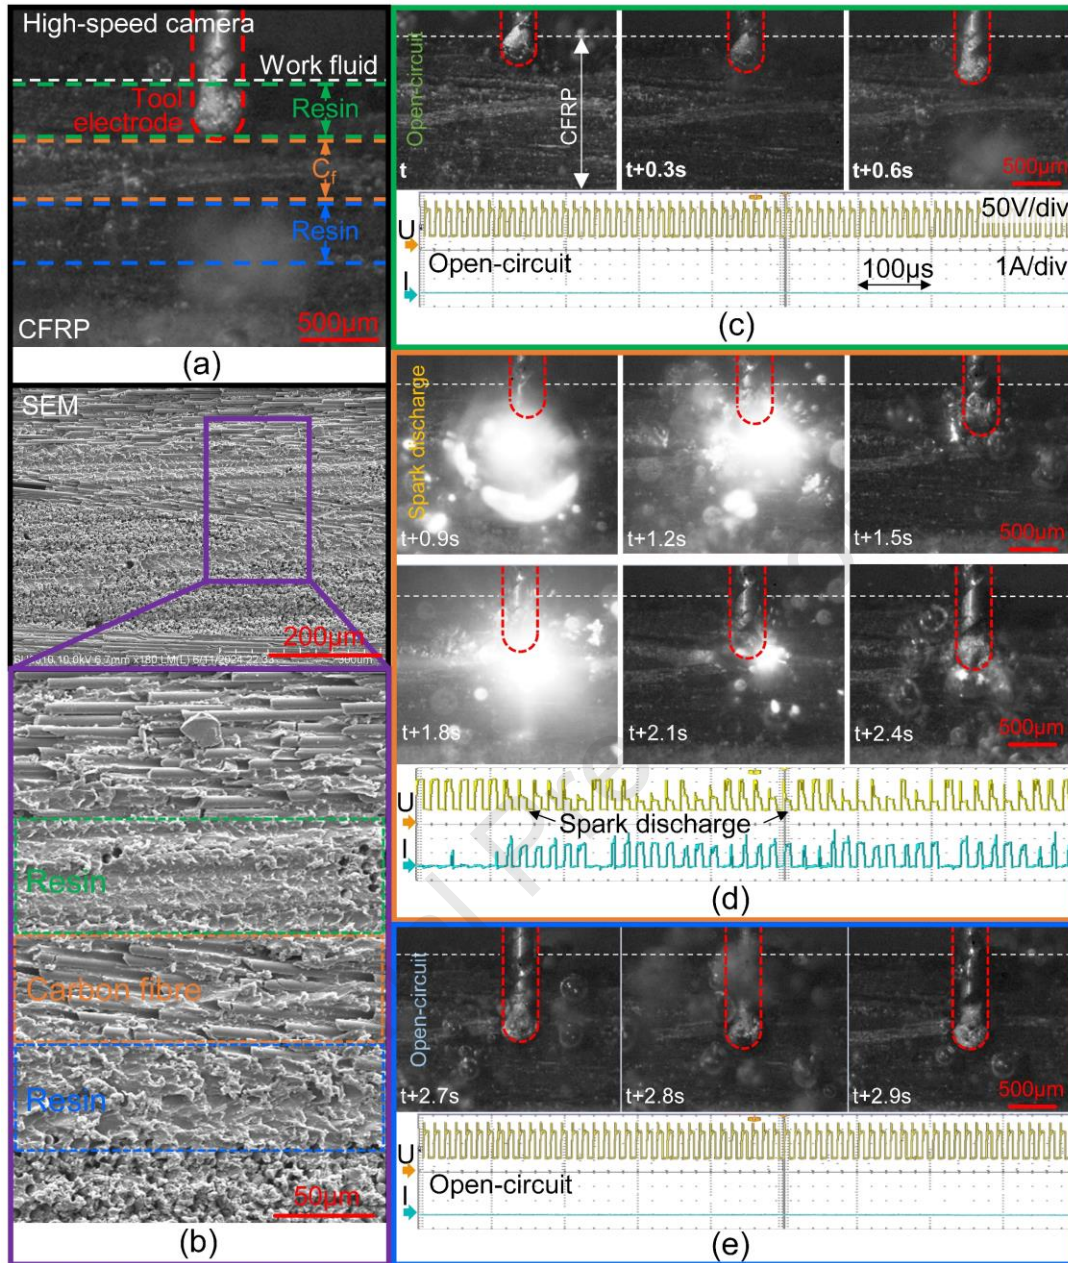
Machining process observation using a high-speed camera. (a) Overall diagram of the tool electrode and workpiece in the machining area. (b) Partial enlargement of the workpiece. (c) The machining process and discharge waveforms of the resin layer. (d) The machining process and discharge waveforms of the carbon fibre layer. (e) The machining process and discharge waveforms of the next resin layer. The specific machining process can be seen in Supplementary Video 1.
